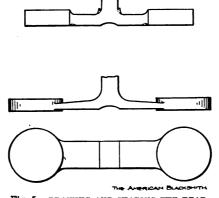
DRAWING AND SHAPING THE HEAD END PIECES.
